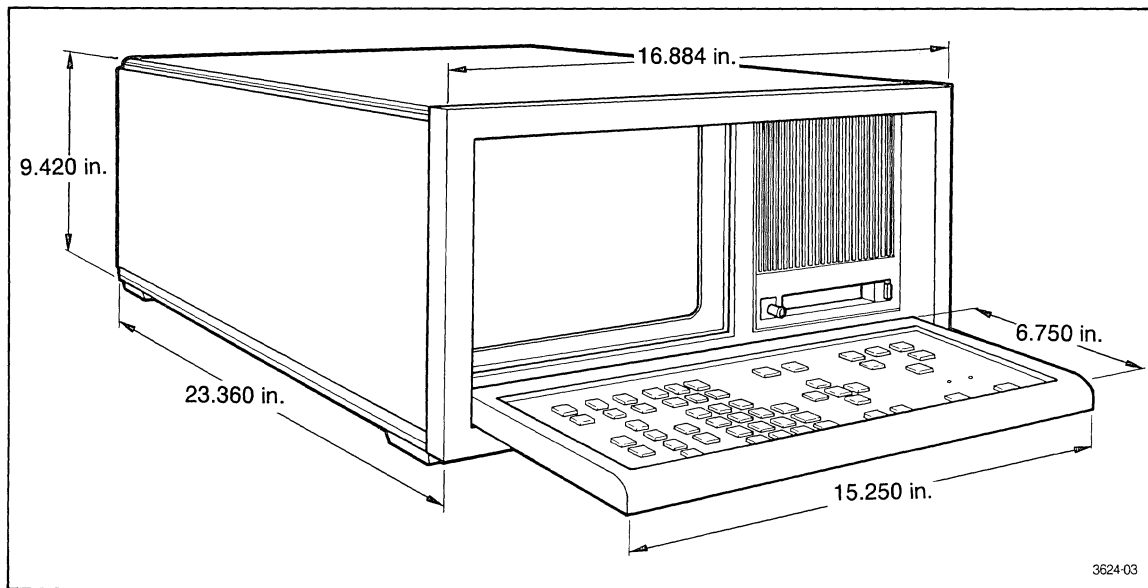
Overall dimensions of the DAS9129 and DAS9109 Mainframes.
